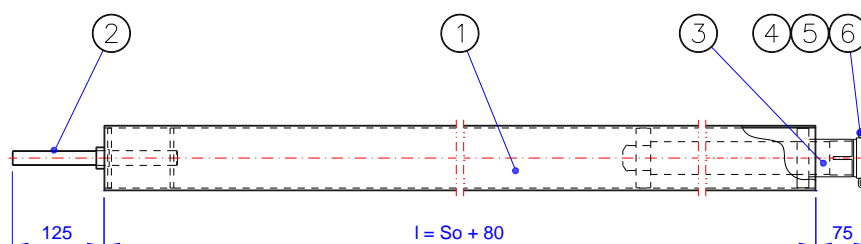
MARC-Ok120-01.02.00 [Winding shaft]
